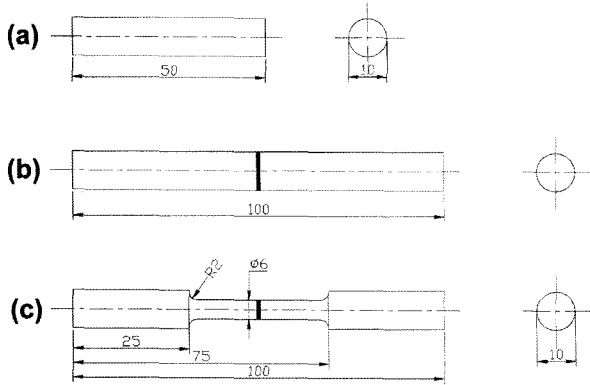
Schematic of brazing specimen and base metal for tensile testing. (a) brazing specimen, (b) brazed joint, and (c) tensile test specimen.
